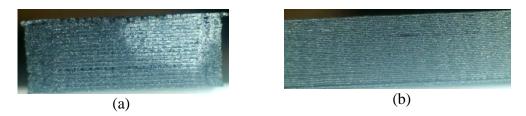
CF PLA linear infill specimen (a) fracture surface (b) side wall
